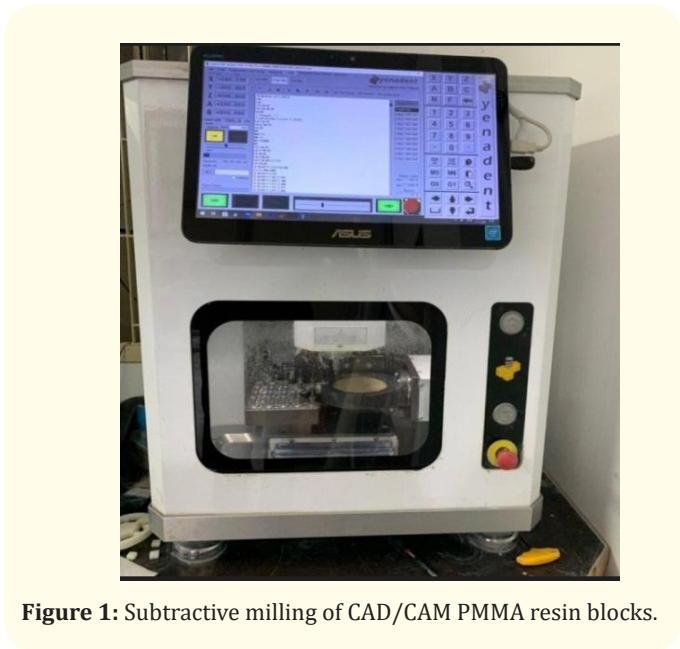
Subtractive milling of CAD/CAM PMMA resin blocks.
